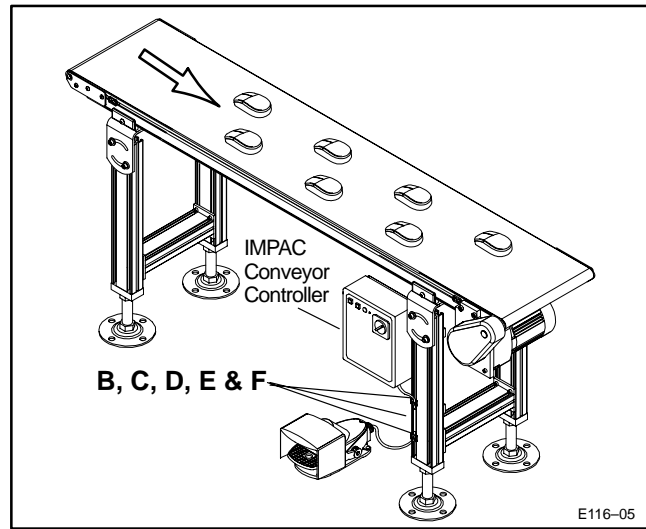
Foot Switch Cable Routing to *impac* Conveyor Controller
